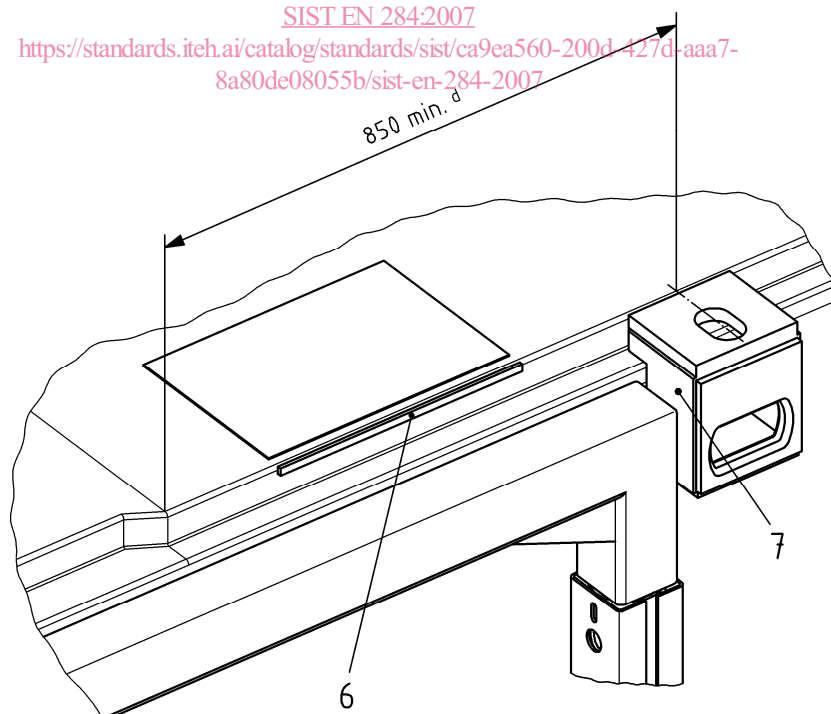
Grapppler flange safety lip with corner casting as end stop – three dimensional view, seen from the bottom
